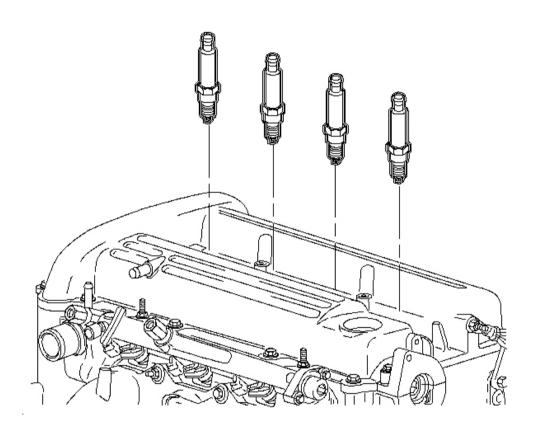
View Of Spark Plugs Courtesy of GENERAL MOTORS CORP.
